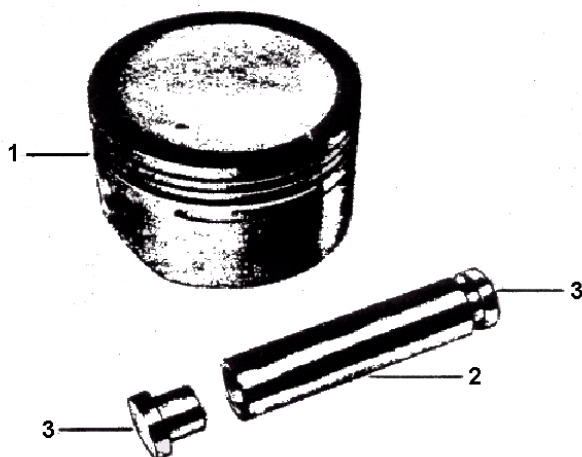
Piston, Piston Pin and Piston Pin Plug:
